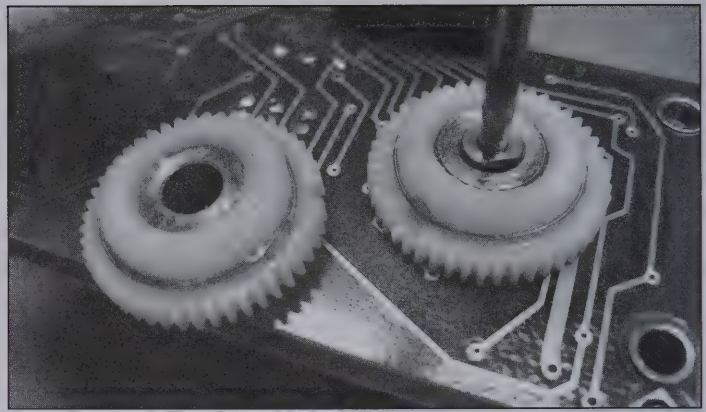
Two repaired gears. One has a missing tooth but is said to still work well. (Erik Paret photo.)
